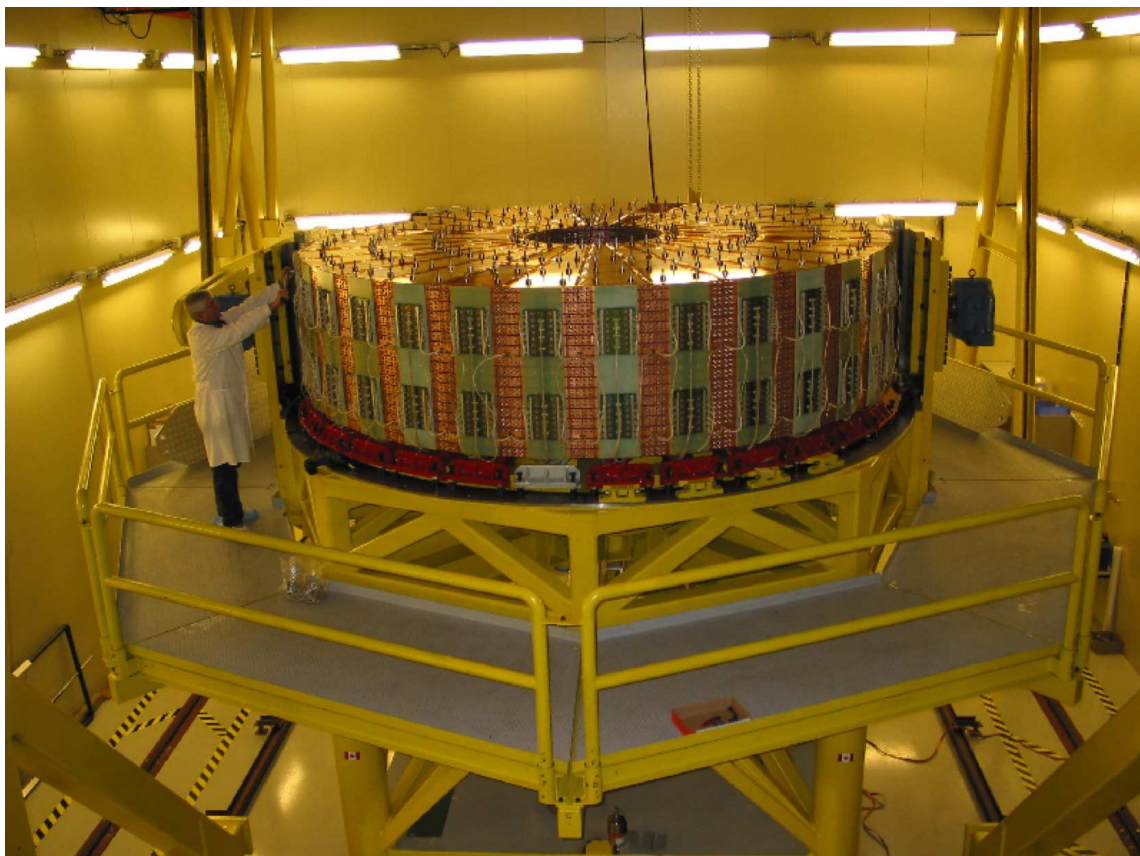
Photograph of a fully assembled HEC wheel on the assembly table. The active-pad electronic boards located on the outer circumference are clearly visible.
